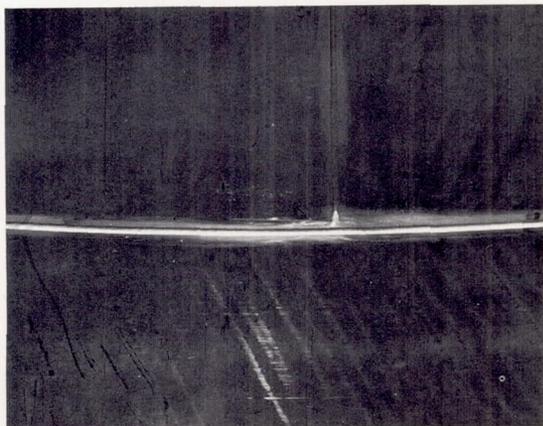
Quality out-of-position weld performed without backup bars using the tack-weld technique.
